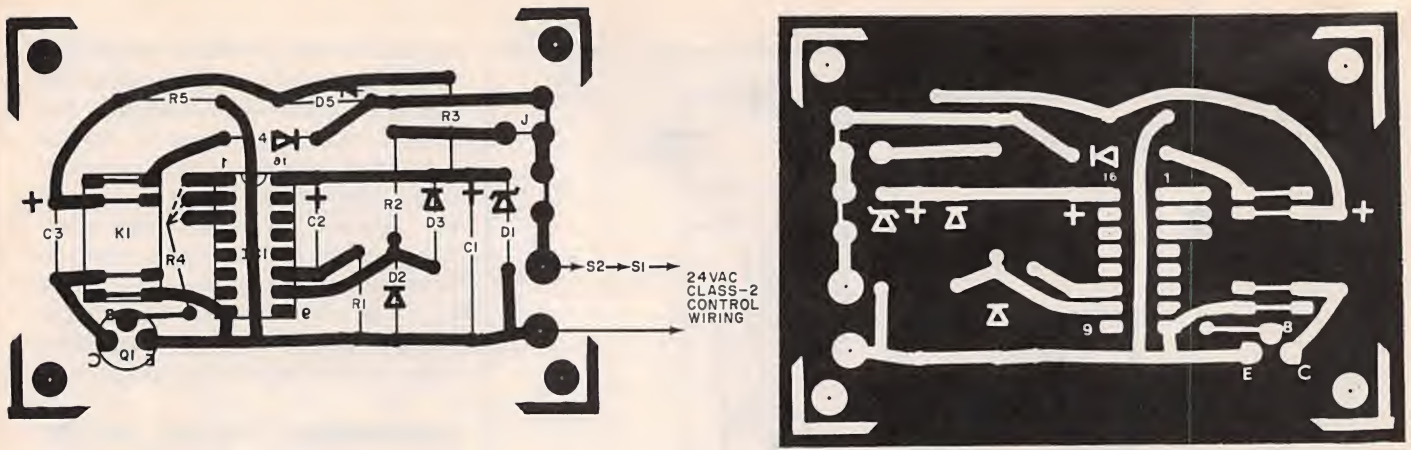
Etching and drilling and parts placement guides for a suitable pc board.
